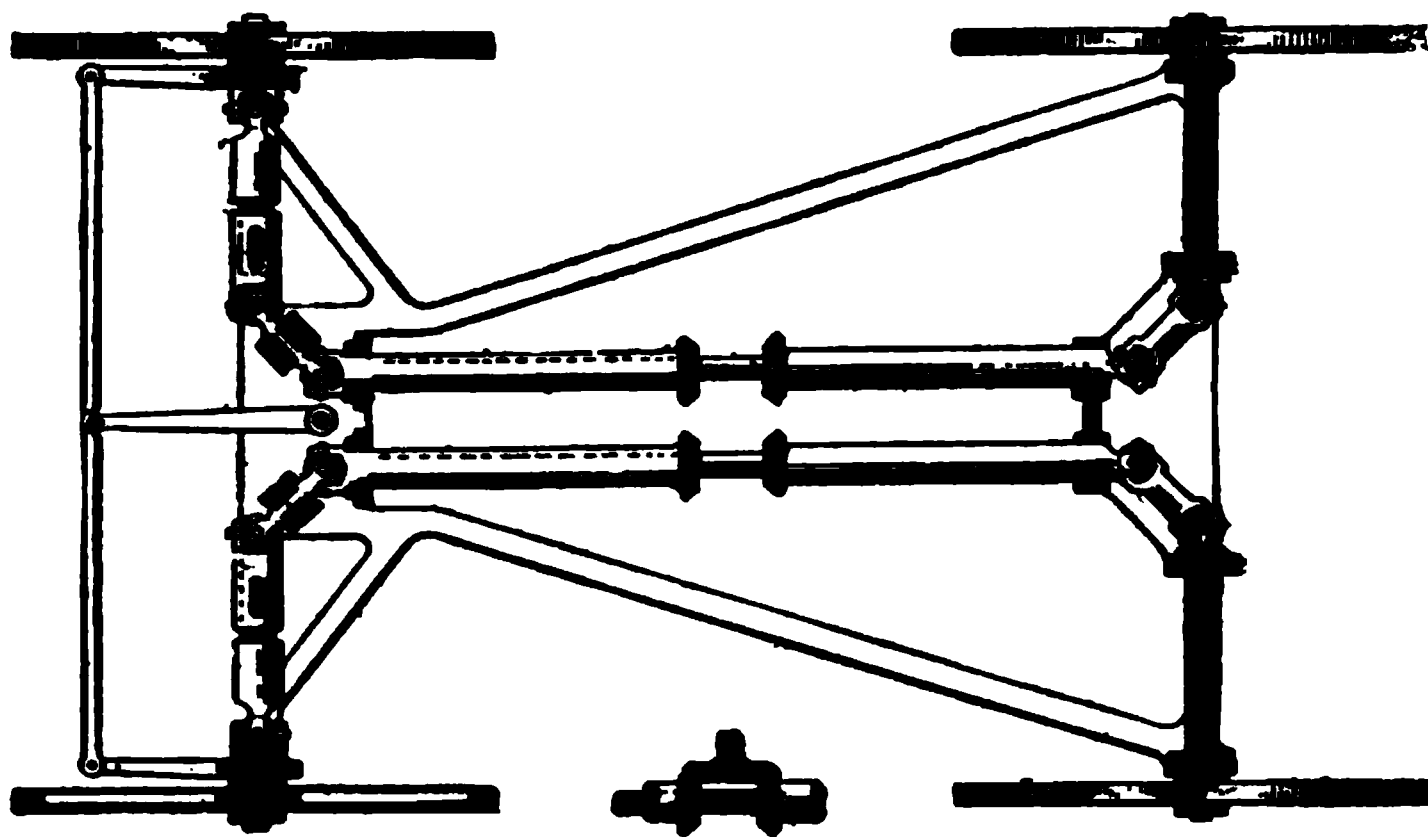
Recently Patented Device for Driving on all Four Wheels by a System of Universal joints. The steering arms are not inclined, since the wheels being driven follow their paths without slipping.
